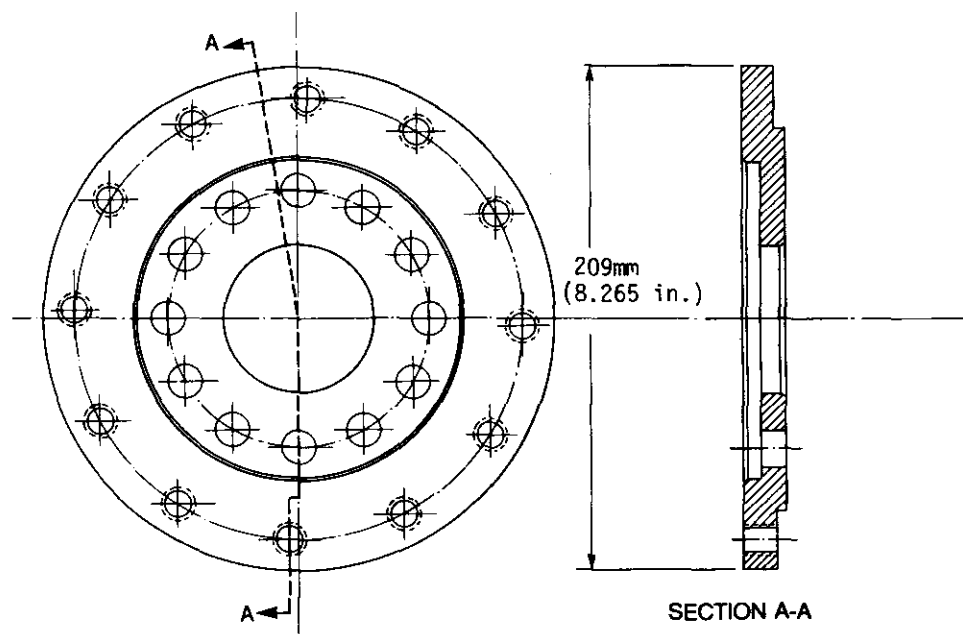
Crankshaft adapter, Part No. 6882609
